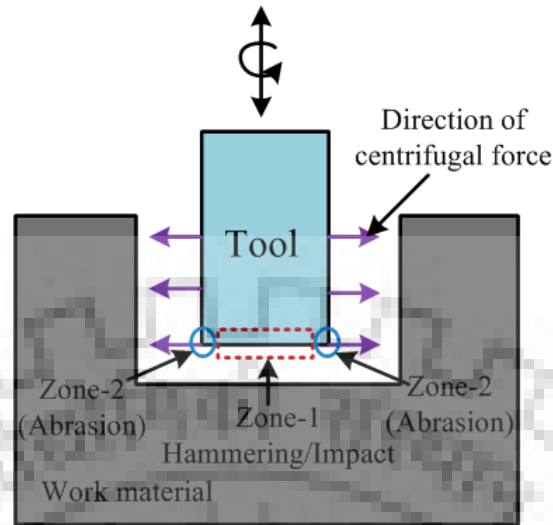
Schematic showing zones of hammering/impact and abrasion of tool
